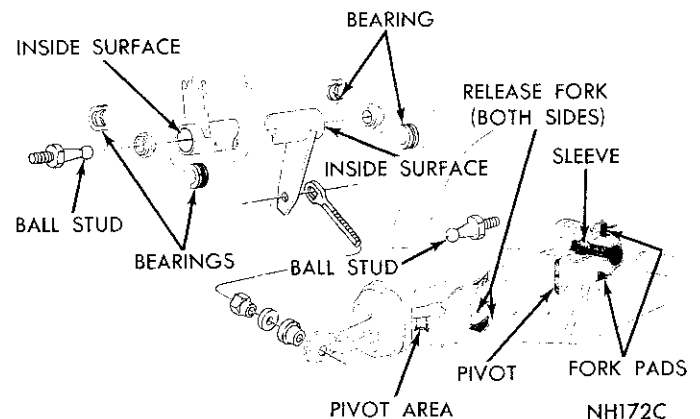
Clutch Torque Shaft Bearings and Linkage
